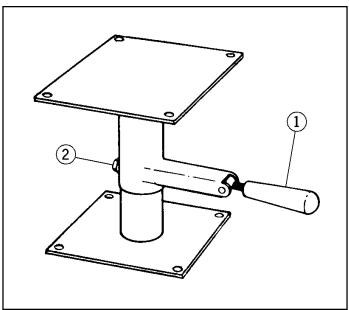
Operator's Seat Pedestal 1. Swivel and height adjusting lever
